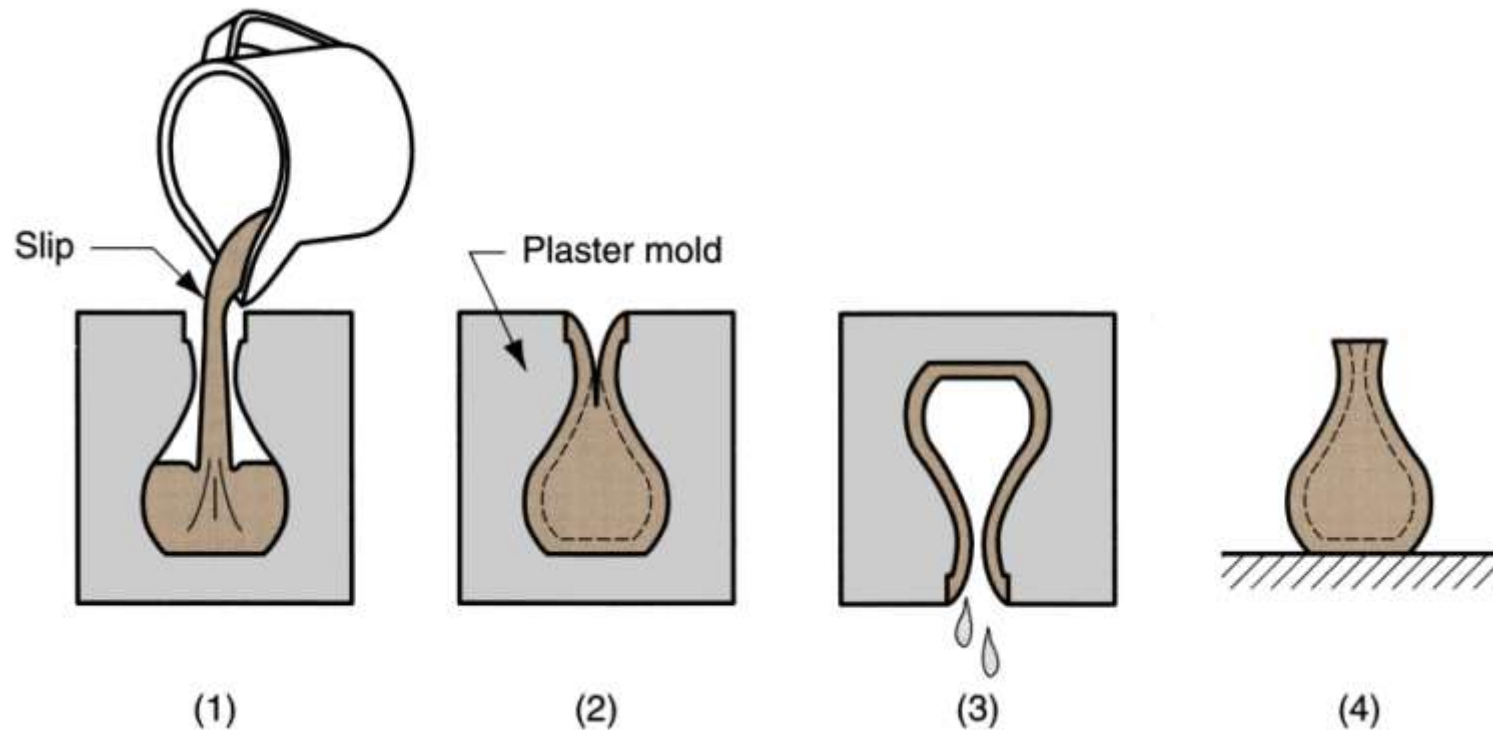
Sequence of steps in drain casting, a form of slip casting: (1) slip is poured into mold cavity, (2) water is absorbed into plaster mold to form a firm layer, (3) excess slip is poured out, and (4) part is removed from mold and trimmed
